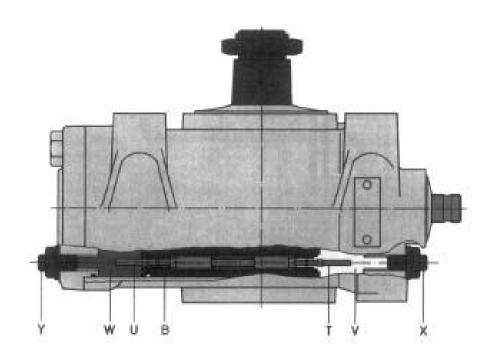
Working principle of the limit valve B.-Piston T-Right limit valve stem U-Left limit valve stem W-Left piston chamber V-Piston right chamber X-Right limit valve regulating bolt Y-Left limit valve regulating bolt
